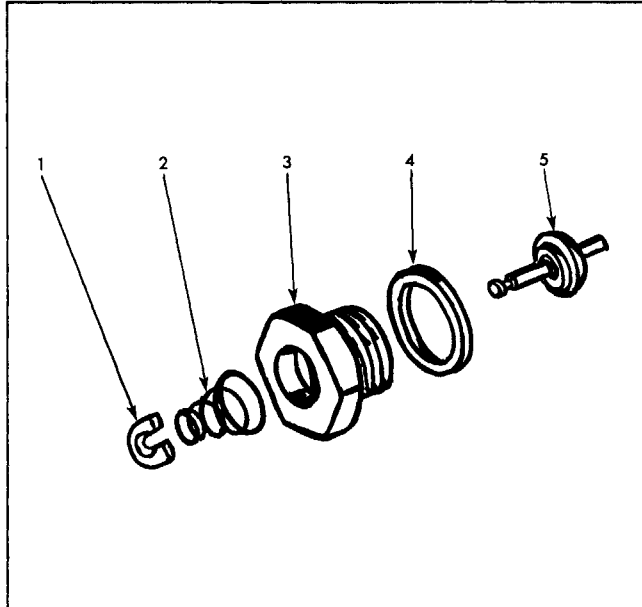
Disassembly or Assembly of Compensating Valve
